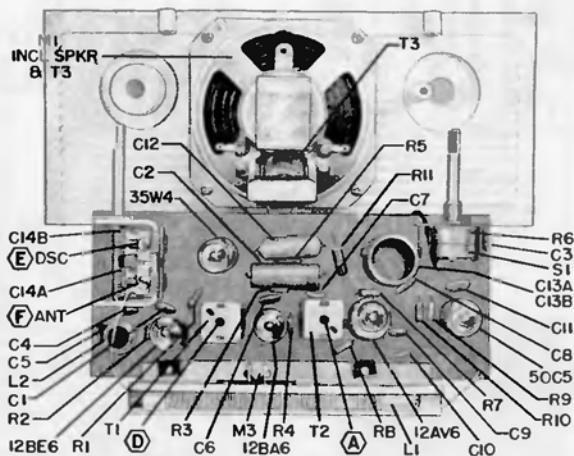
Top View of 5B4 Chassis Showing Location of Components and Alignment Points.
